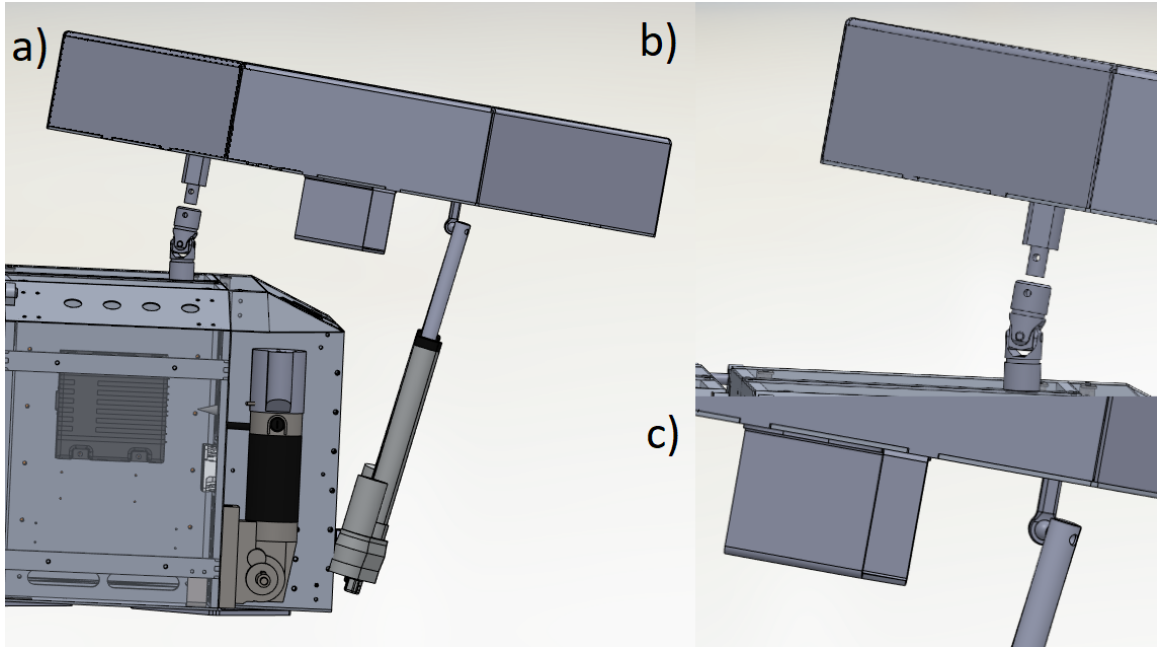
Solidworks design of the landing pad mounting to the UGV also seen in Figure 2.1(d), where a) shows the whole thing, b) shows the u-joint, and c) shows one of the heim joints.
